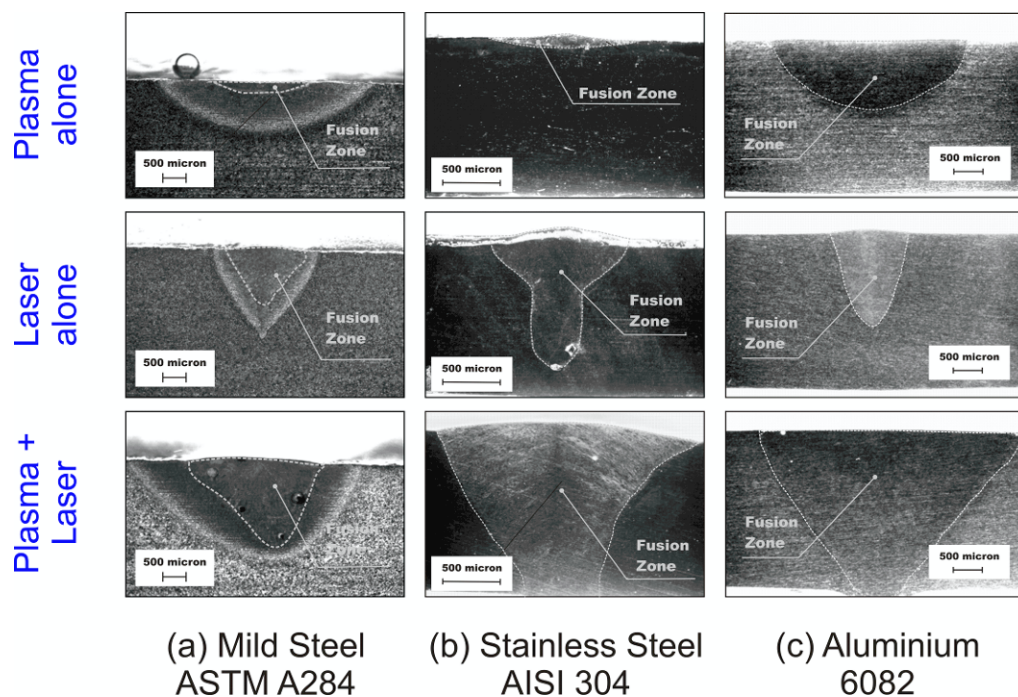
Weld seam cross sections of plasma, laser and laser-assisted plasma bead-on-plate welds in different base materials at 600 W laser power and 100 A arc current. (a) ASTM A284 mild steel, 10 mm thickness, 0.5 m min^{-1} welding speed. (b) AISI 304 stainless steel, 1.5 mm thickness, 1.5 m min^{-1} welding speed. (c) Aluminium alloy 6082, 2.5 mm thickness, 1.5 m min^{-1} welding speed.
